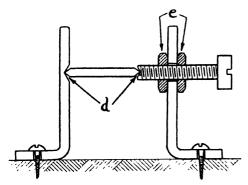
AN ADJUSTABLE NEEDLE BEARING
